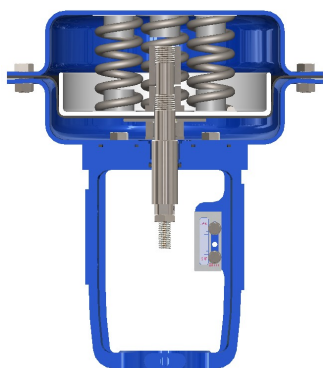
Cross Sectional Drawing AO-3600 Diaphragm Actuator (Direct Acting)
